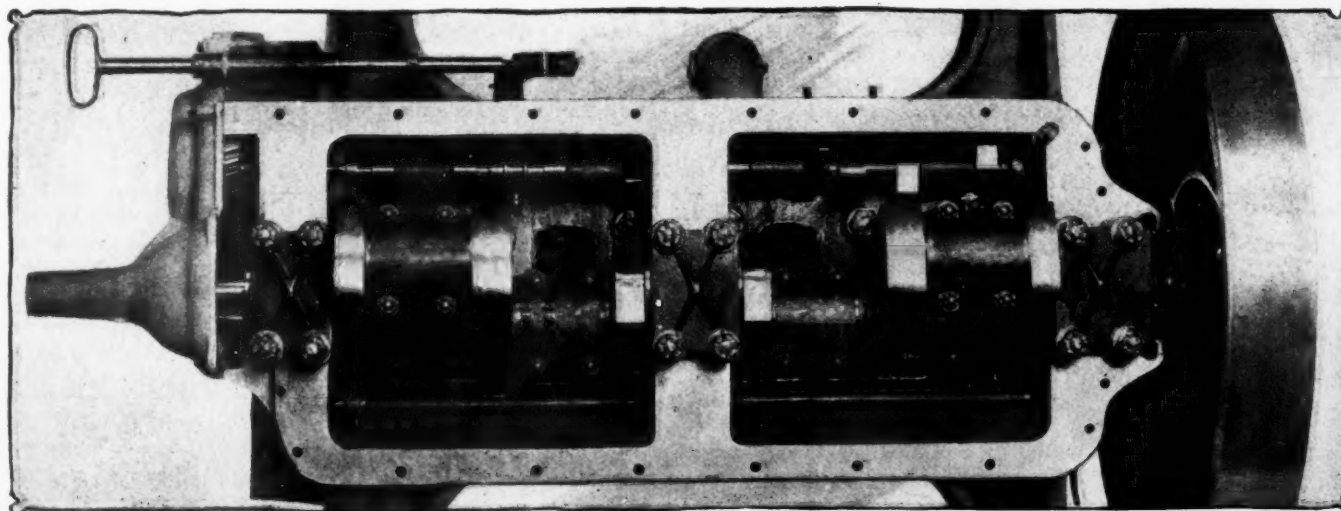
Looking down into the crankcase casting of the Fiat model 55 four-cylinder motor which uses non-splash oiling
